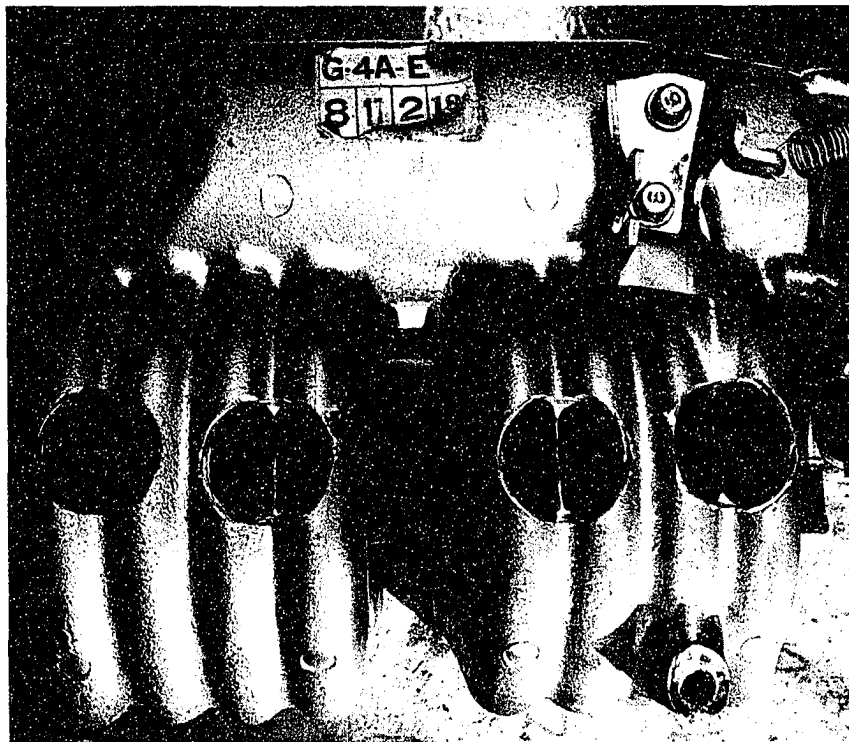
Modified Toyota Intake Manifold shown with Holes Drilled to Accommodate the manifold bridge.
